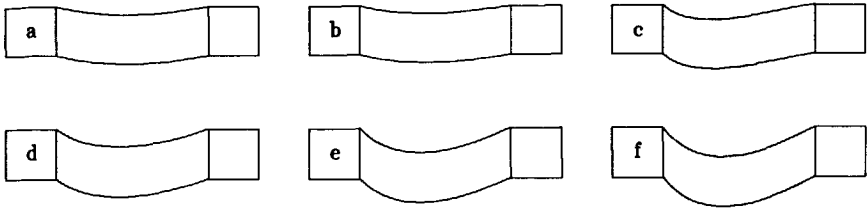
Schematic drawing of observed weld pool surface movement in the case of mode 2 oscillation (travelling arc welding) based on the analysis of film 3.
